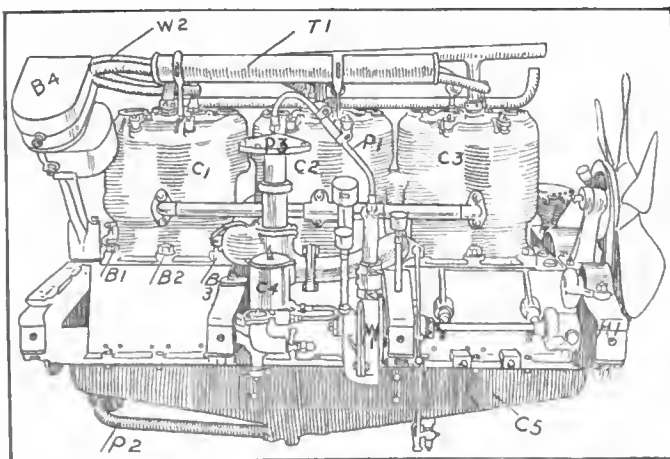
Sketch of right side of six-cylinder Napier motor, showing the diaphragm connection from the carburetor to the water pump, secure wiring, and four points of fastening to the chassis frame.
